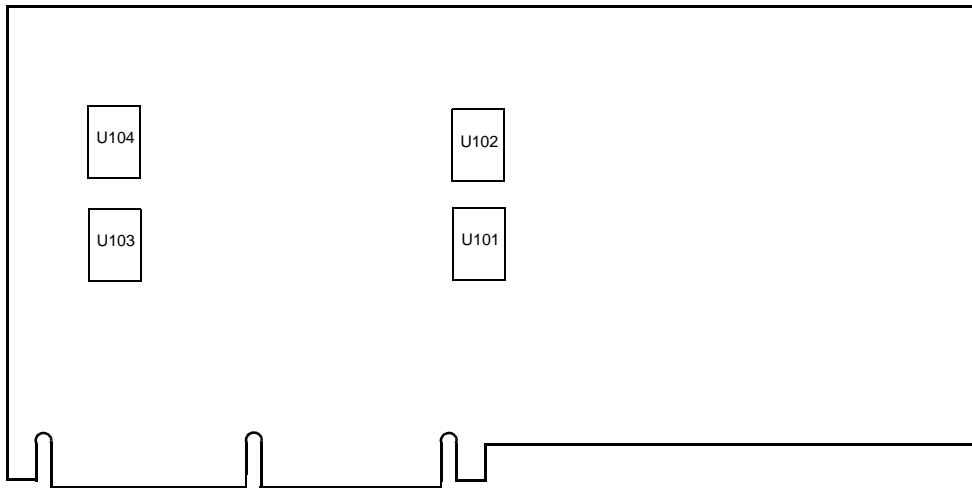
shows the AlphaPC 264DP daughtercard and its components, and Table 2–2 describes these components.
